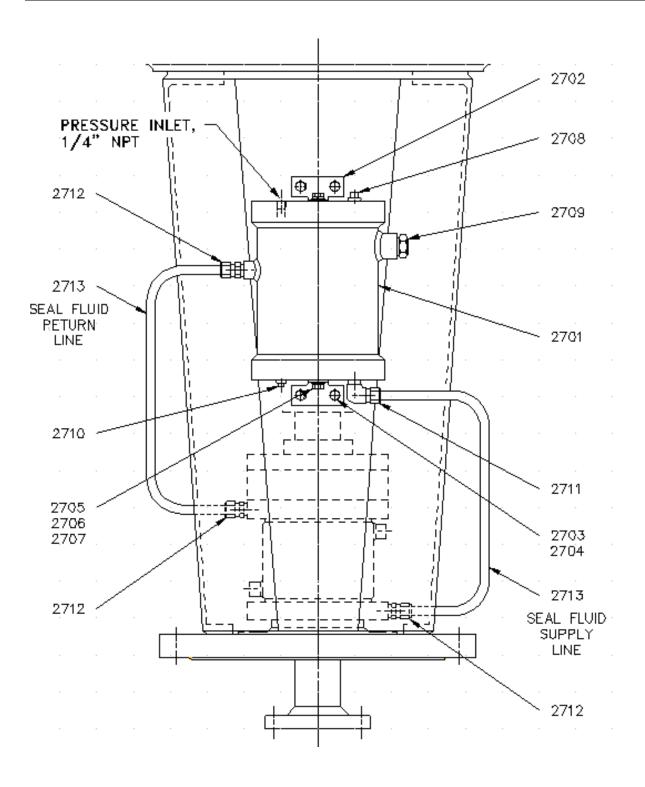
Mechanical Seal (Cartridge Type) Lubricator
